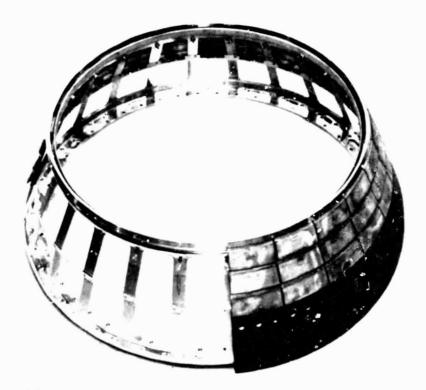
Inner Combustor Support Frame with several Advanced Liner Segments Installed
